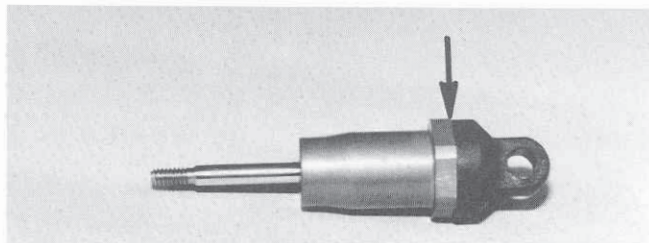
1) Again in both bag #8-9 and bag #8-10 you will find the shock caps. In the bushing kits they will be #6428 plastic shock caps. In the ball bearing kits they will be #6439 aluminum shock caps.
